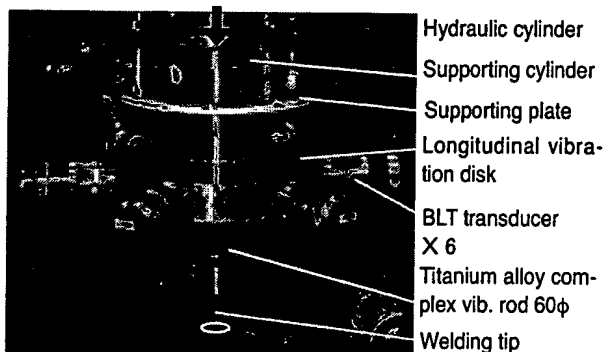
The 27 kHz ultrasonic vibration source fixed to a hydraulic cylinder of a welding frame using a stepped complex transverse vibration rod with a supporting flange.
